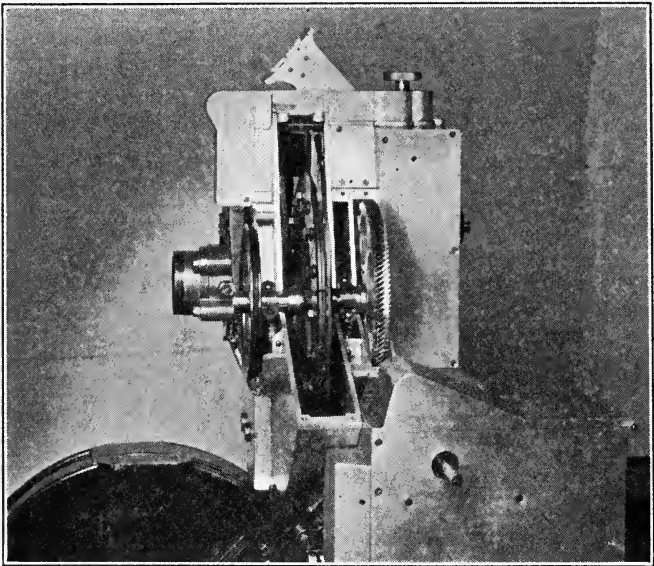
Left side view of mechanism with cover plates removed, showing lens wheel shaft assembly and bearings.
